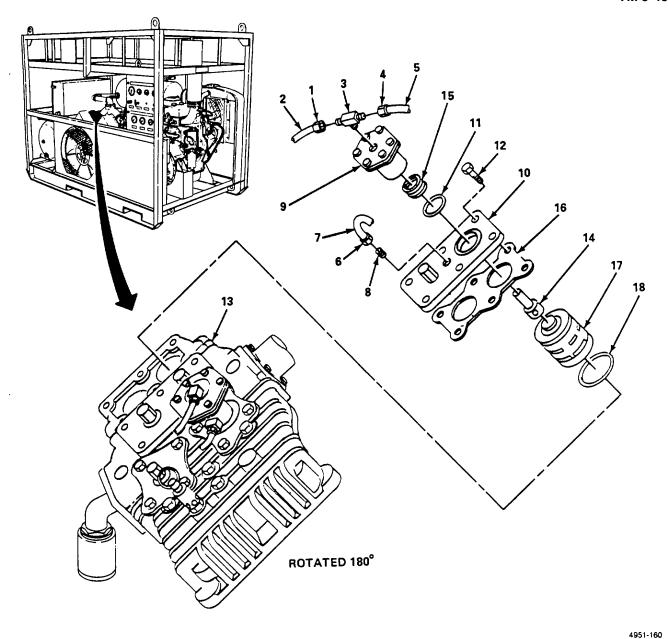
Compressor Unloader Assembly With 6 Bolt Flange, Removal.
